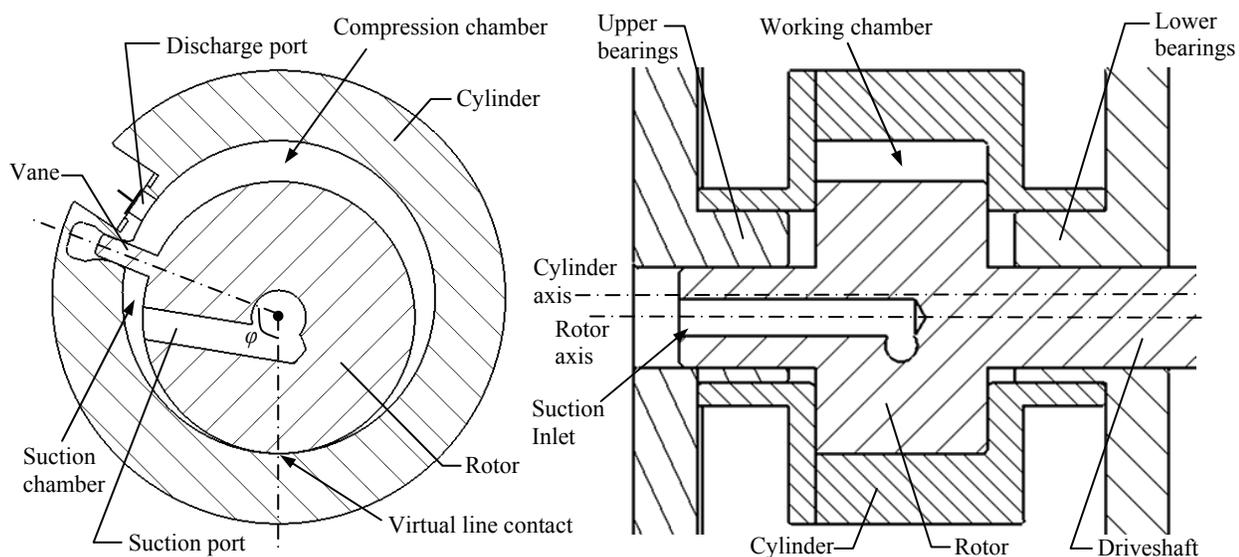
(Left) Front sectional view of RV-i compressor; (Right) Side sectional view of RV-i compressor with journal supports shown
